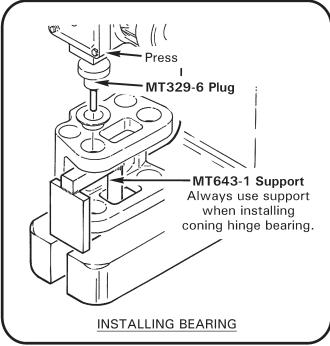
MAIN ROTOR HUB BEARING REPLACEMENT
